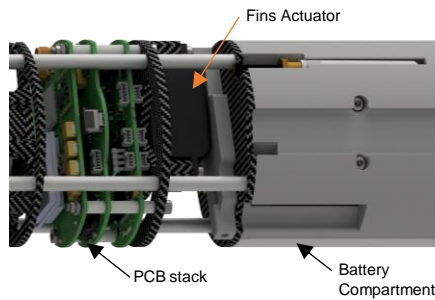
PCB Stack, Fins Actuator and Battery Compartment.
